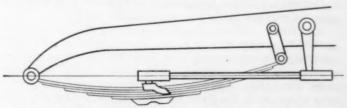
Having the Front and Rear Ball-Joints and the Front Spring-Bolt in a Straight Line as Shown Will Cure Wheel Wabble
